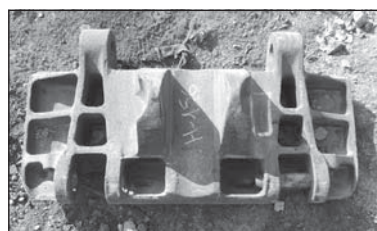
Hot cracks in the wall of casting «Track link»
